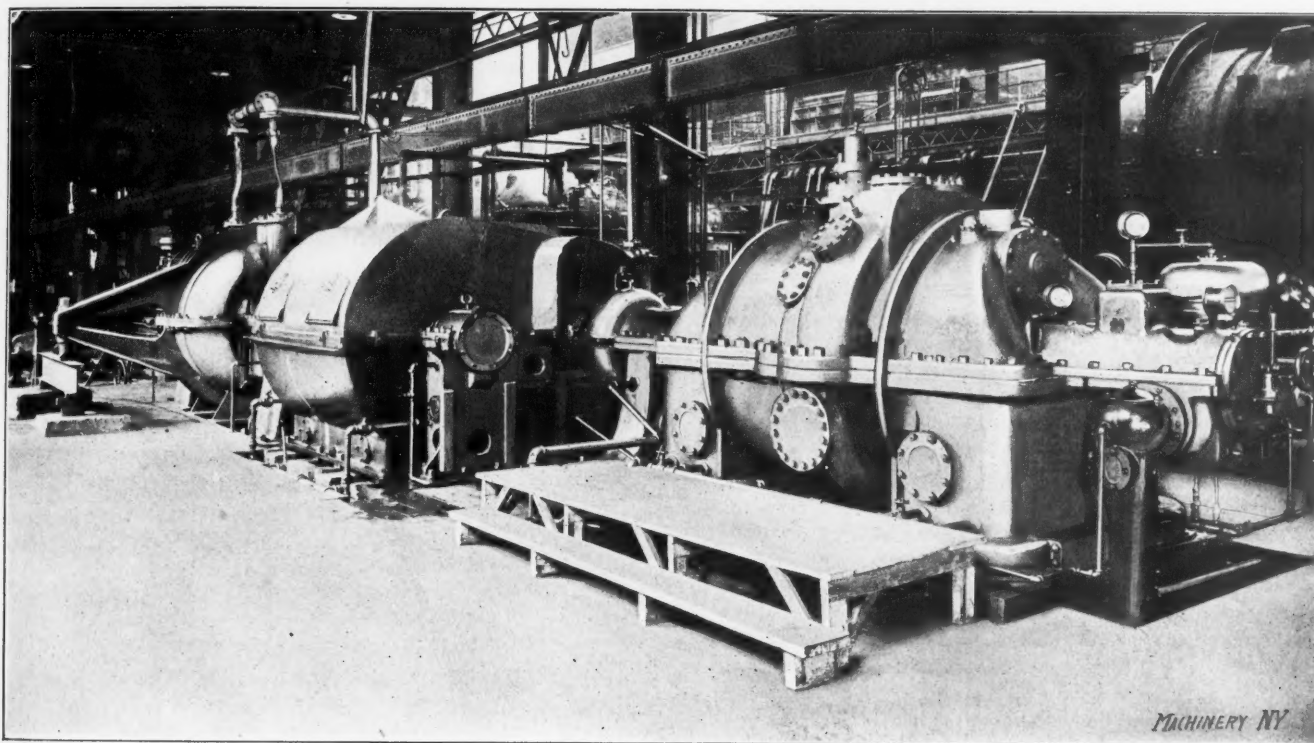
6,000-horsepower Steam Turbine, Melville-Macalpine Reducing Gearing, and Hydraulic Dynamometer, set up on Floor of Testing Department
